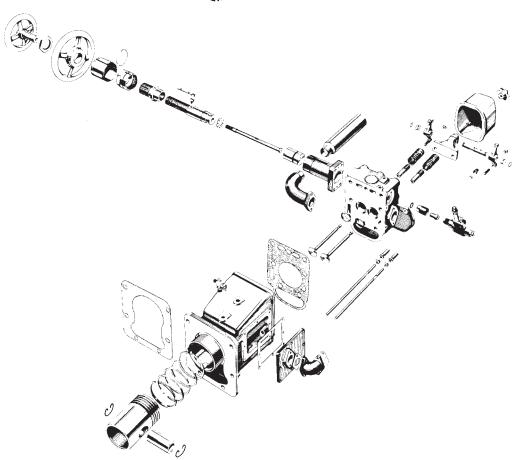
Exploded View of Cetane Cylinder and Head Assembly
